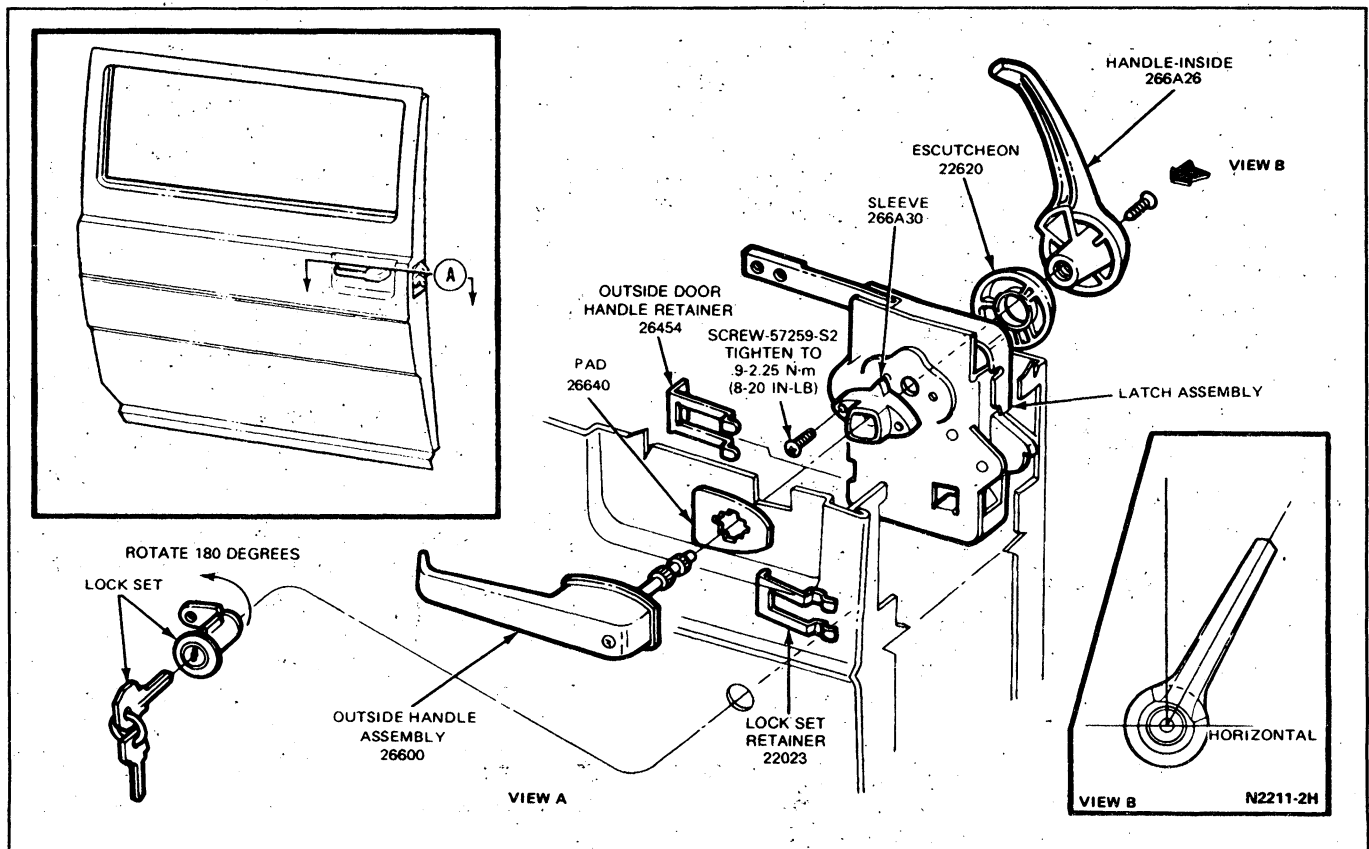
Sliding Door—Lock and Latch—E-150—E-350
